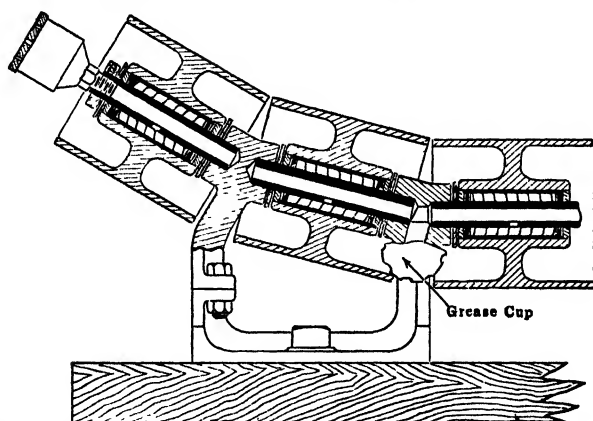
Roller Bearings Applied to Five-pulley Troughing Idler (1915).
